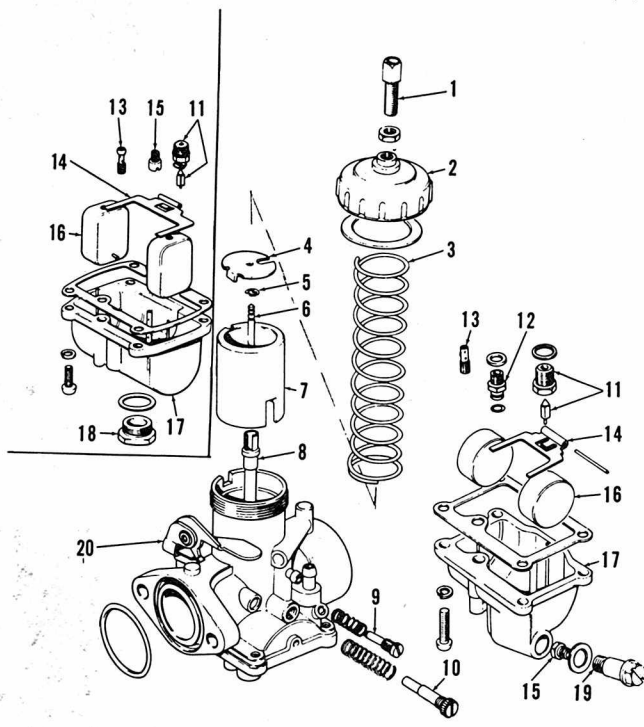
Exploded view of carburetor used on TS 250 R. Inset shows float assembly used on early models.
